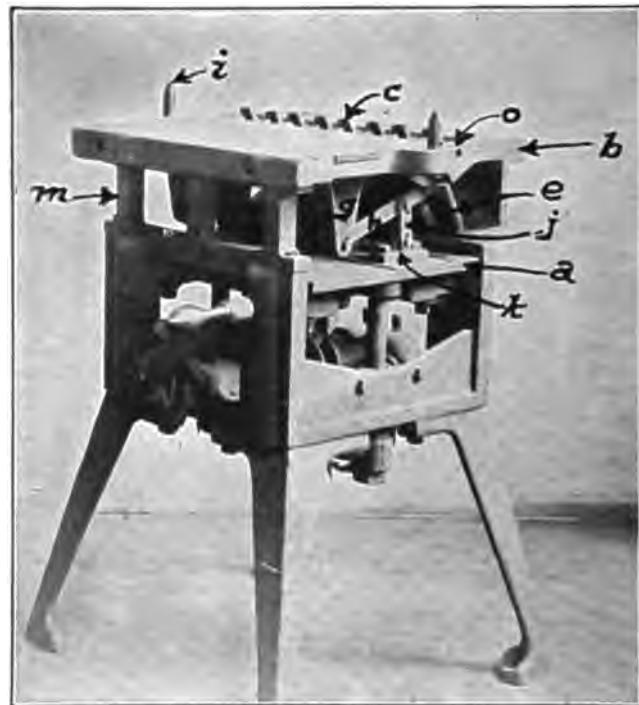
Drag Machine with Pattern in Position to Make Mold
